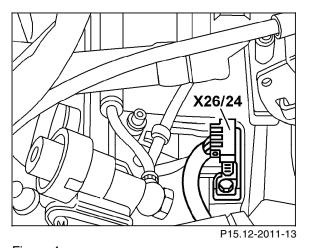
Engine 111 HFM-SFI X26/24 Engine /ignition coils connectors (3-pole)
